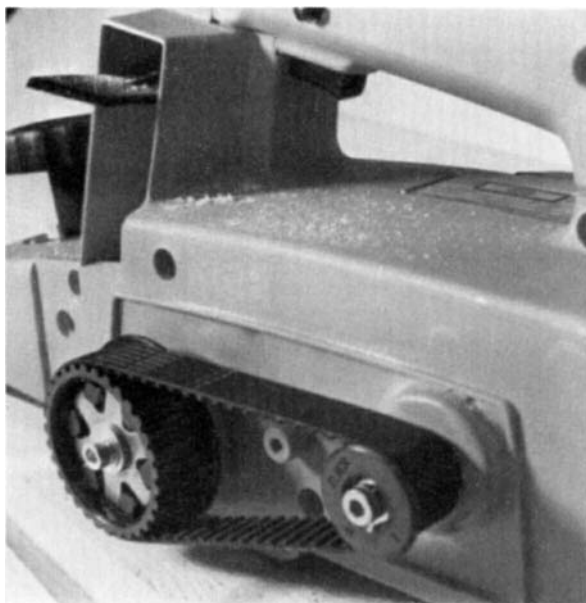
Planer machine drive with Synchrobel timing belt; the driving speed is $30\,000\text{ min}^{-1}$. (*Continental Gummi-Werke Aktiengesellschaft.*)
